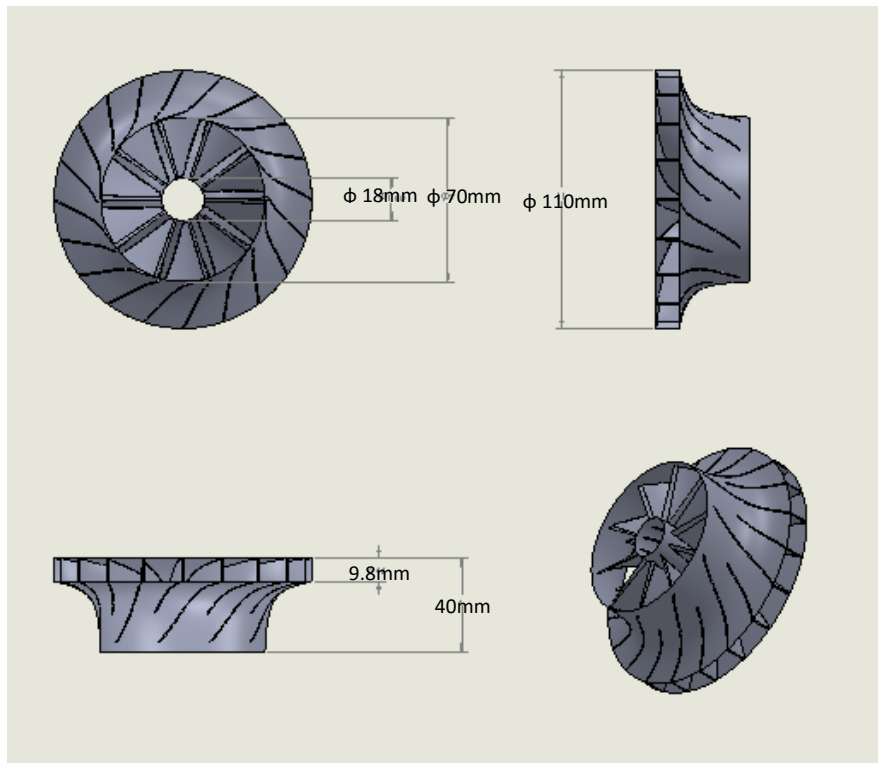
IMPELLER DIAGRAM AND DIMENSION. ADAPTED FROM SOLIDWORKS DRAWING
